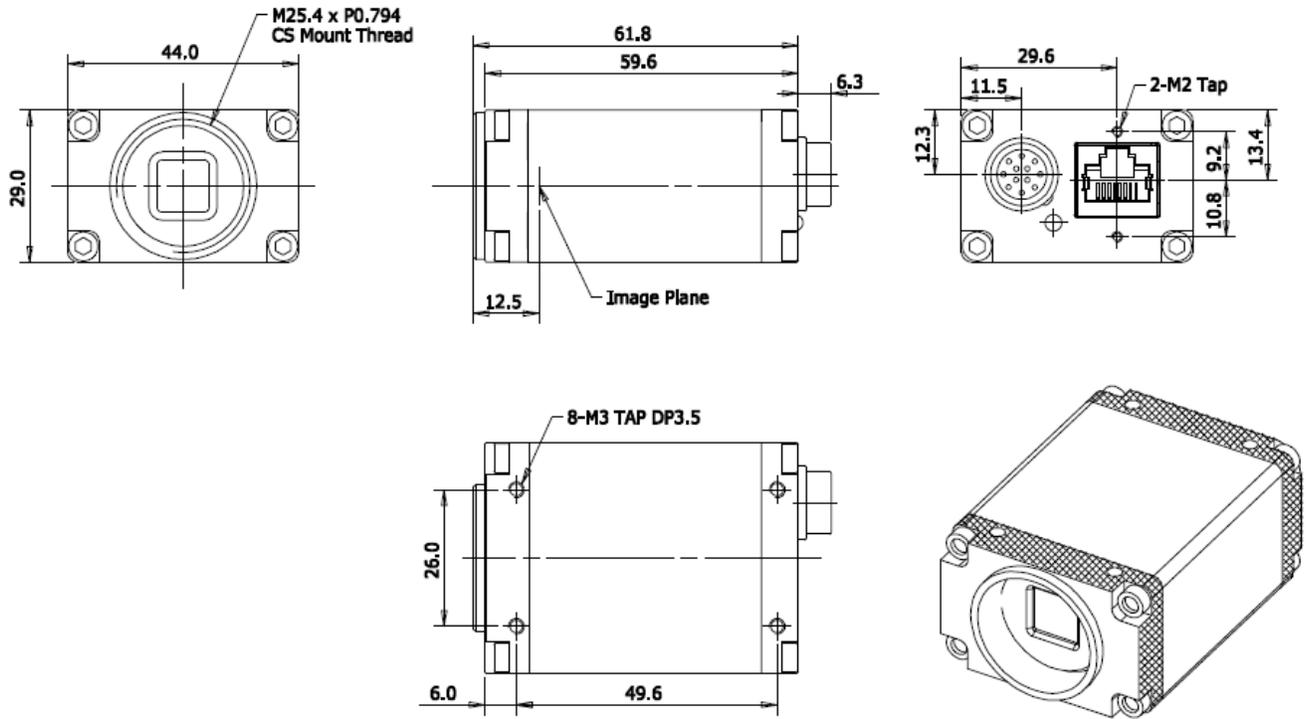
VQ-310G-M400 CS-mount Mechanical Dimension
